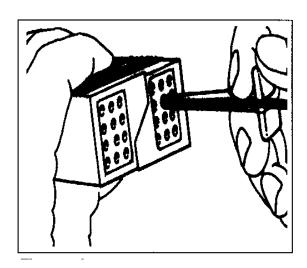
Slide Extractor Tool Along Wire Straight into Connector Cavity
